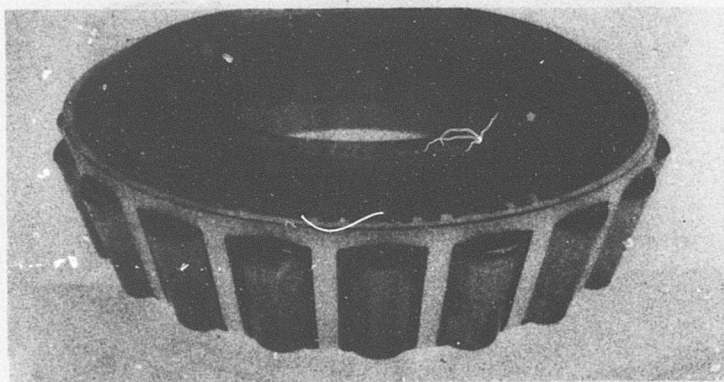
HM926700-Series Bearing After Test, Bearing No. 9--Okay After Running in Test Numbers 13. Through 17 and Test No. 21.
